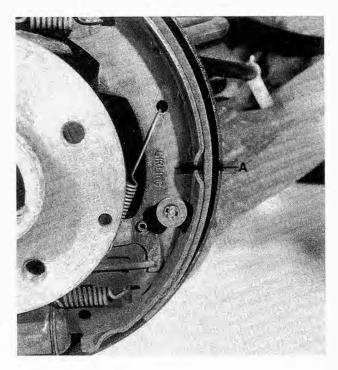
Rear brake lining thickness being checked after brake drum is removed. Dimension A shows minimum brake lining thickness.
